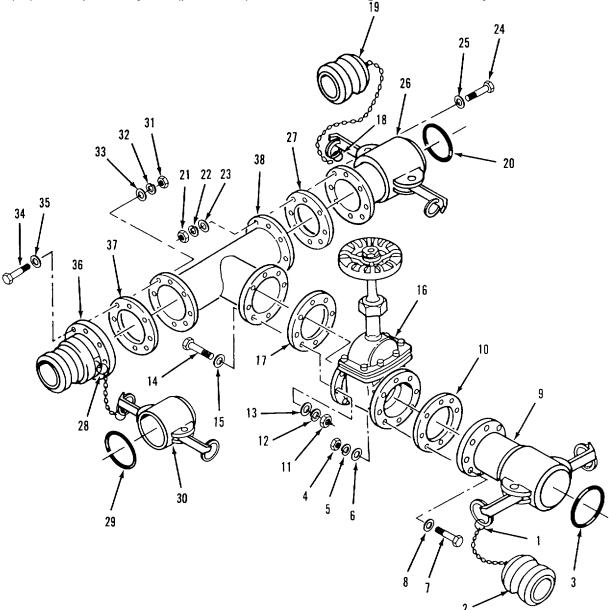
Tee and Gate Valve Assembly (9114-Y6) Assembly.
